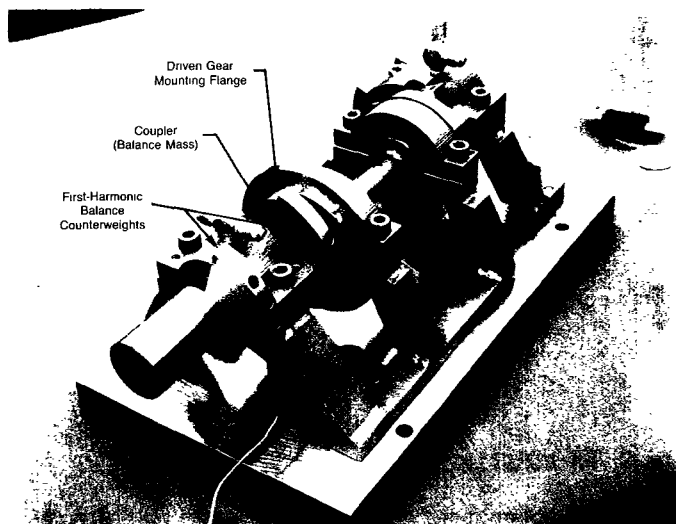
Oldham-Coupling Balancer for 90° V6 Engine.
